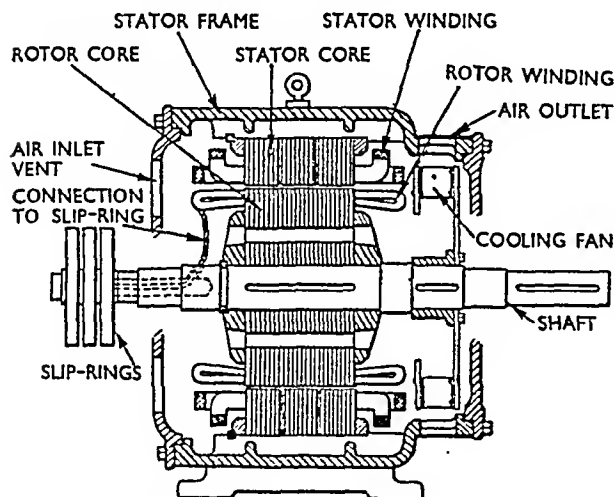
Section of an induction motor of the slip-ring type showing the main features. A roller bearing would be used at the pulley end, and at the slip-ring end either a ball bearing or a combination of roller and ball bearings.
